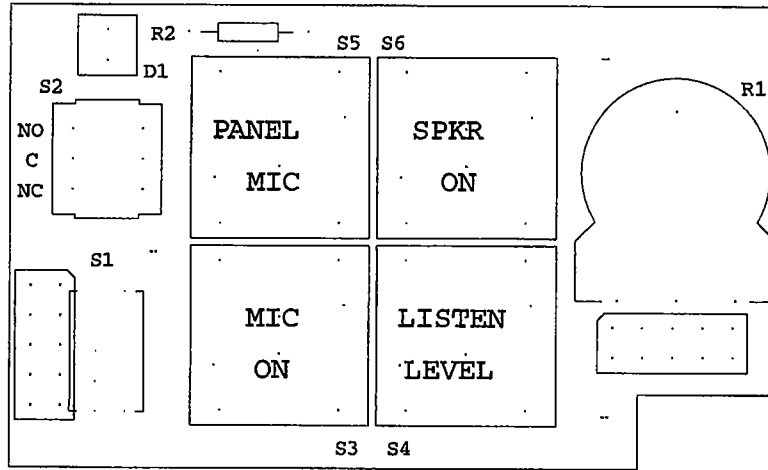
Assembly Drawing—ICS-92/92T
